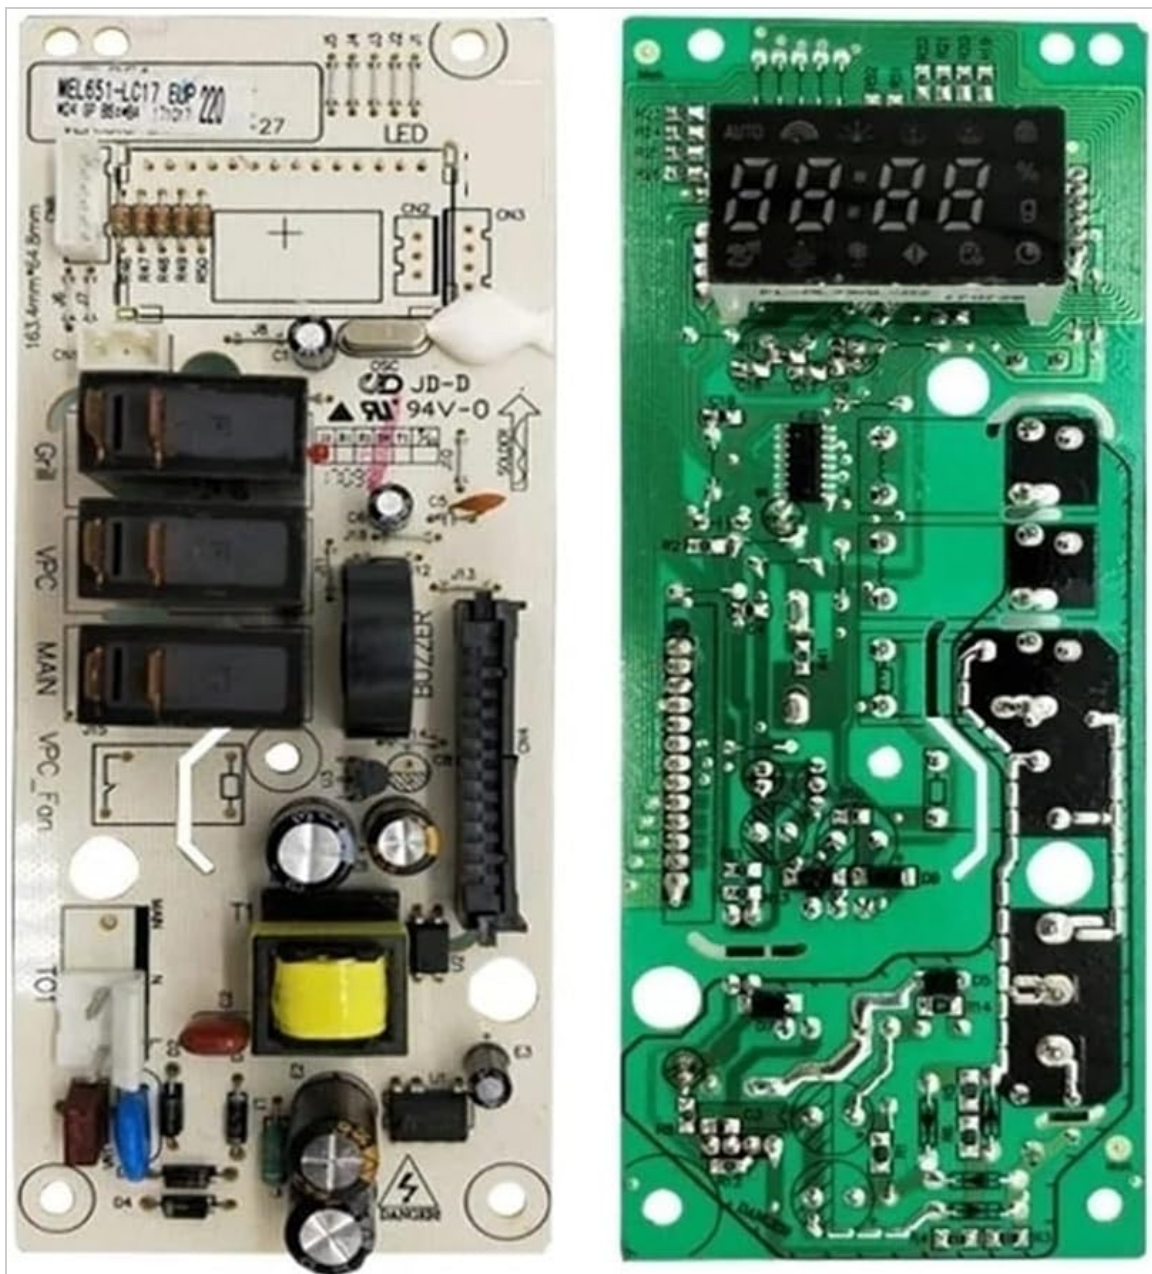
A detailed view of both the green control board and the white power board, highlighting various
